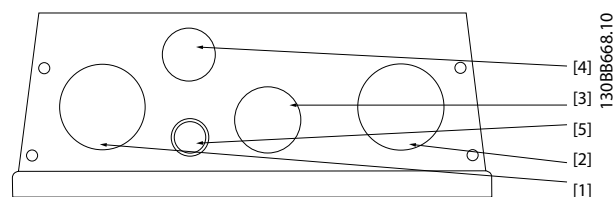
Enclosure Size B1, IP55 Threaded Gland Holes
